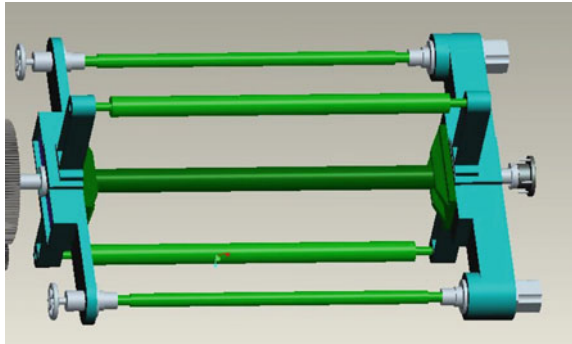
describes the paper scroll driving mechanism and the rotary support paper scroll. The device as feed function has been installed replacing the paper roll used traditionally.
